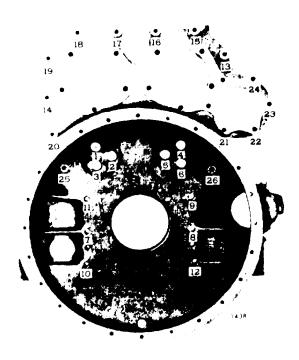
B-107. Flywheel Housing Tightening Sequence (Operation 1)
